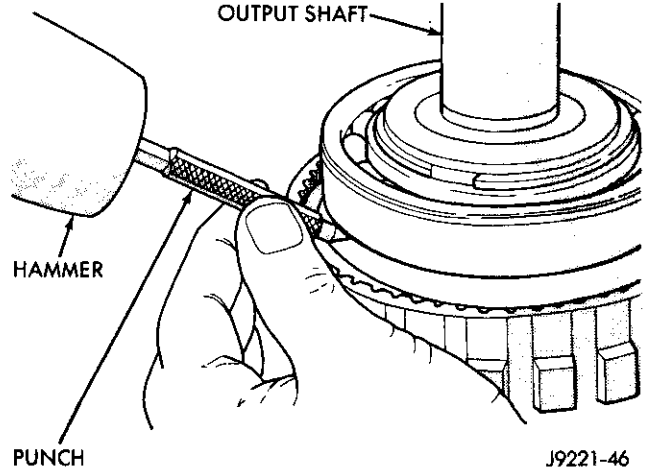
Marking Annulus Gear And Output Shaft For Assembly Alignment
